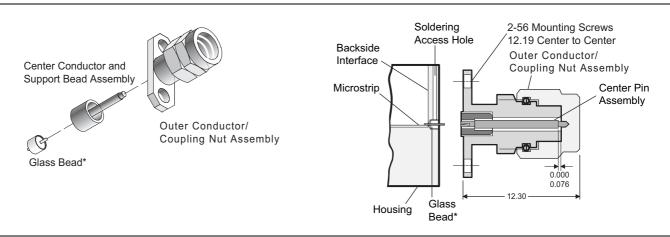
V103M-R Assembly (*Glass Bead not supplied)
